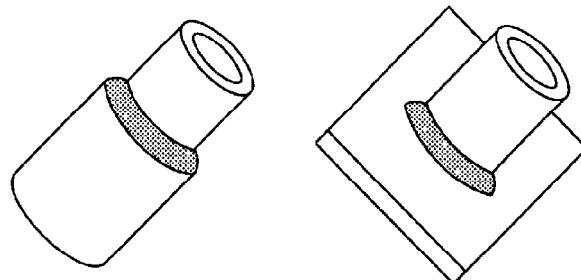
Welding Test Positions and Their Designations for Fillet Welds in Pipe
